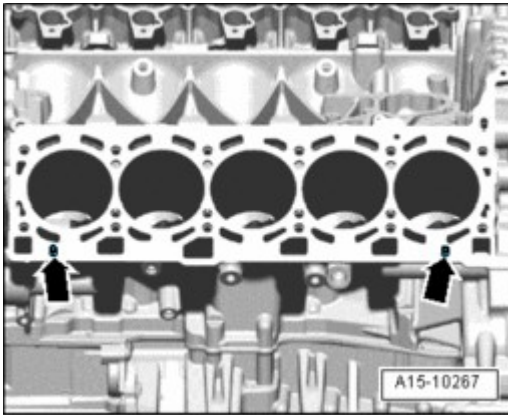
Identifying Alignment Bushings In Cylinder Block
